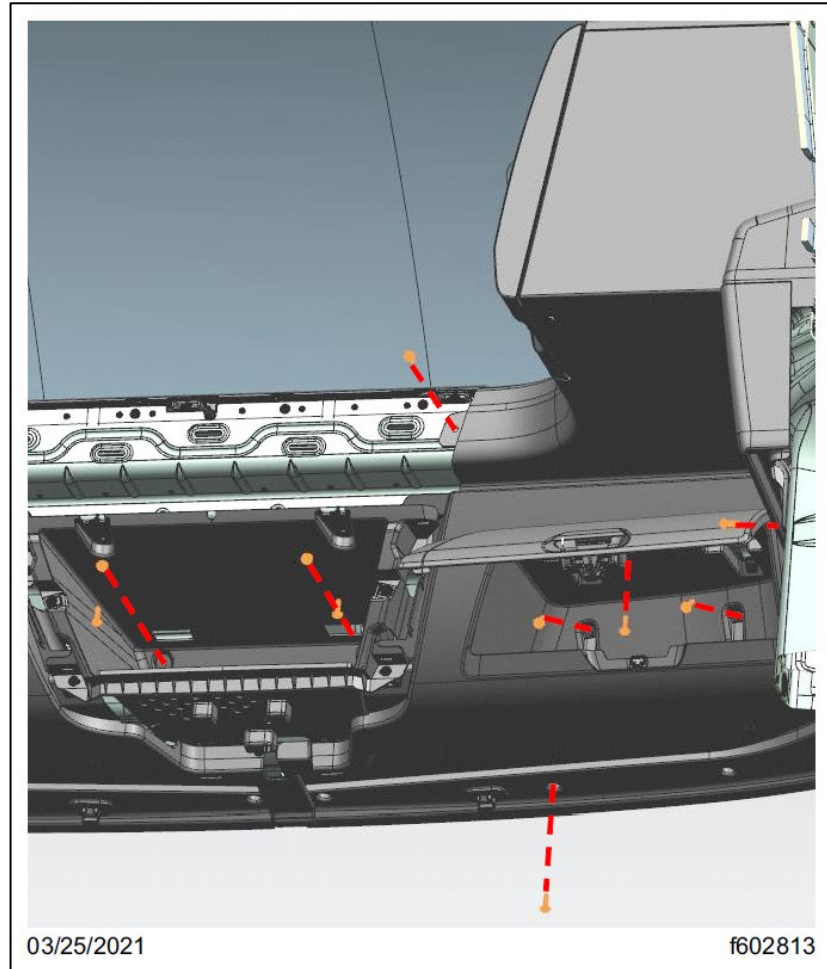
, Fasteners That Attach the Center Storage Bin and the RH Side Overhead Storage Assembly to the Cab Roof
